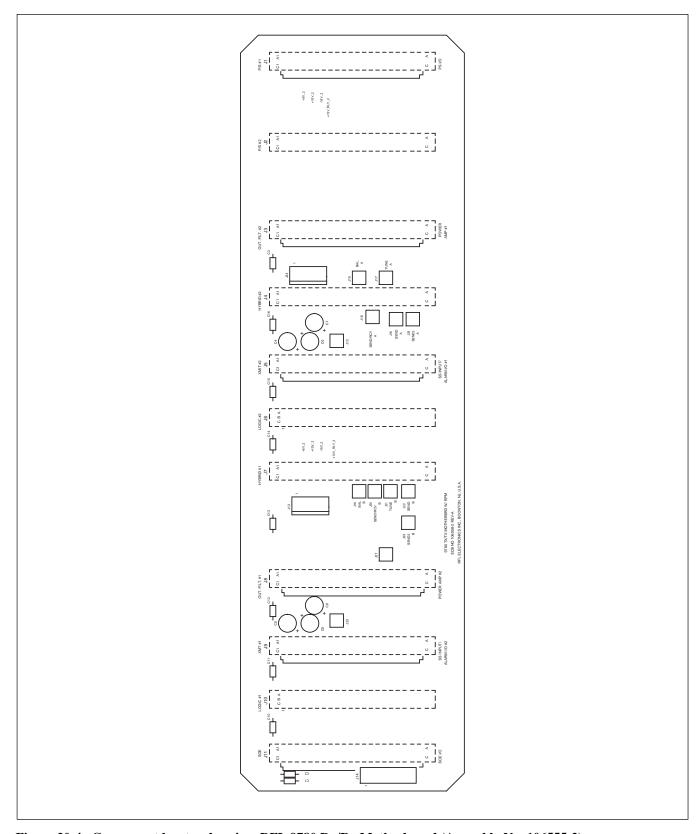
Component locator drawing, RFL 9780 Rx/Rx Motherboard (Assembly No. 106555-2)
